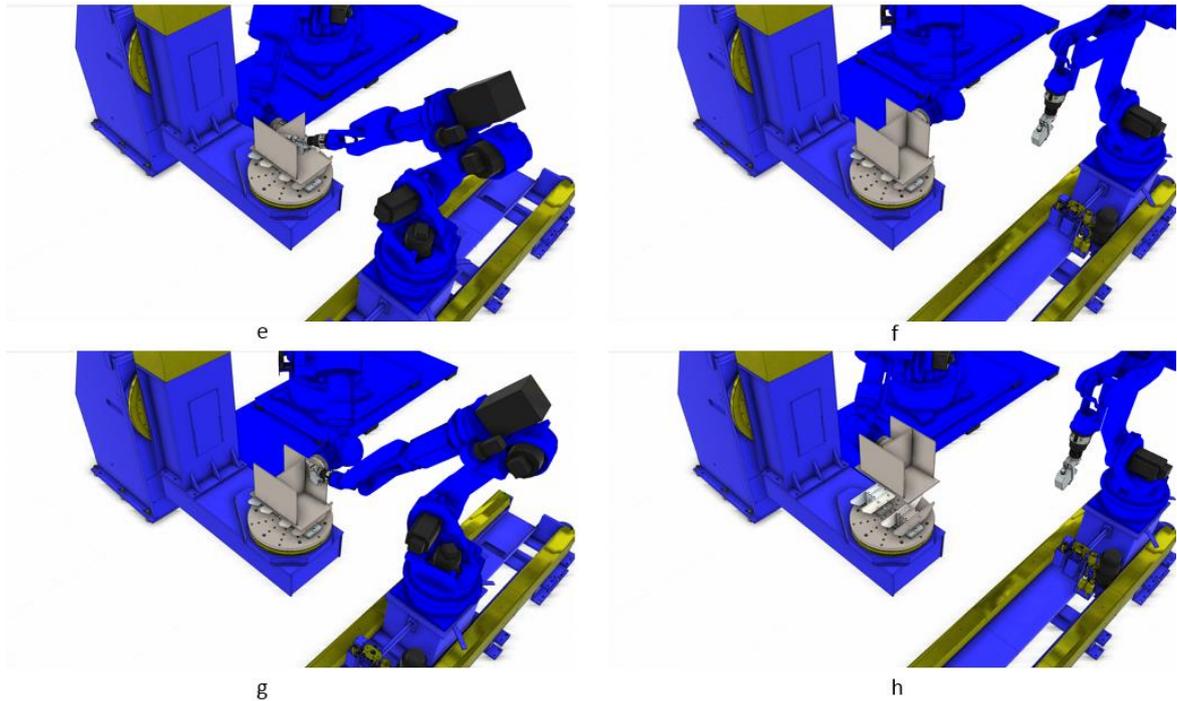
Phases of simulation continues. E) tack welding of the third part, f) the fourth part is brought to the assembly, g) the fourth part is tack welded and h) the finished workpiece is taken away from the positioner.
